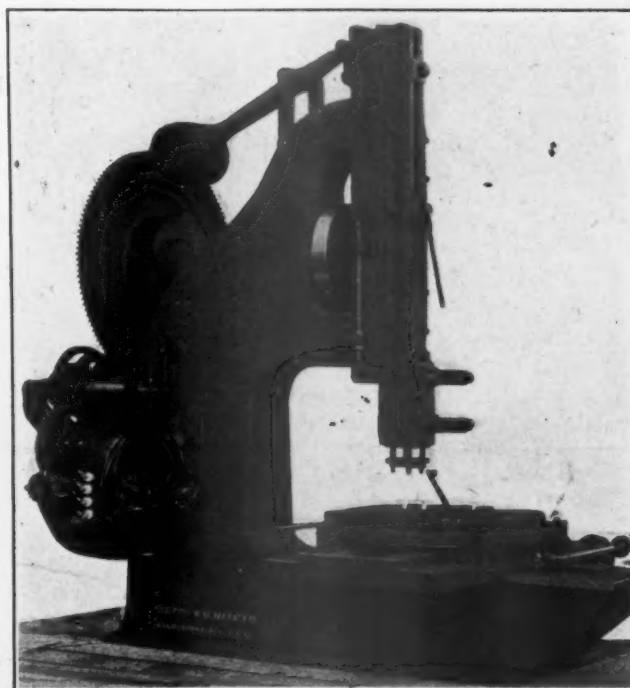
GEARED VARIABLE-SPEED MOTOR-DRIVE UPON A LARGE SLOTTER.—BETTS MACHINE COMPANY.
